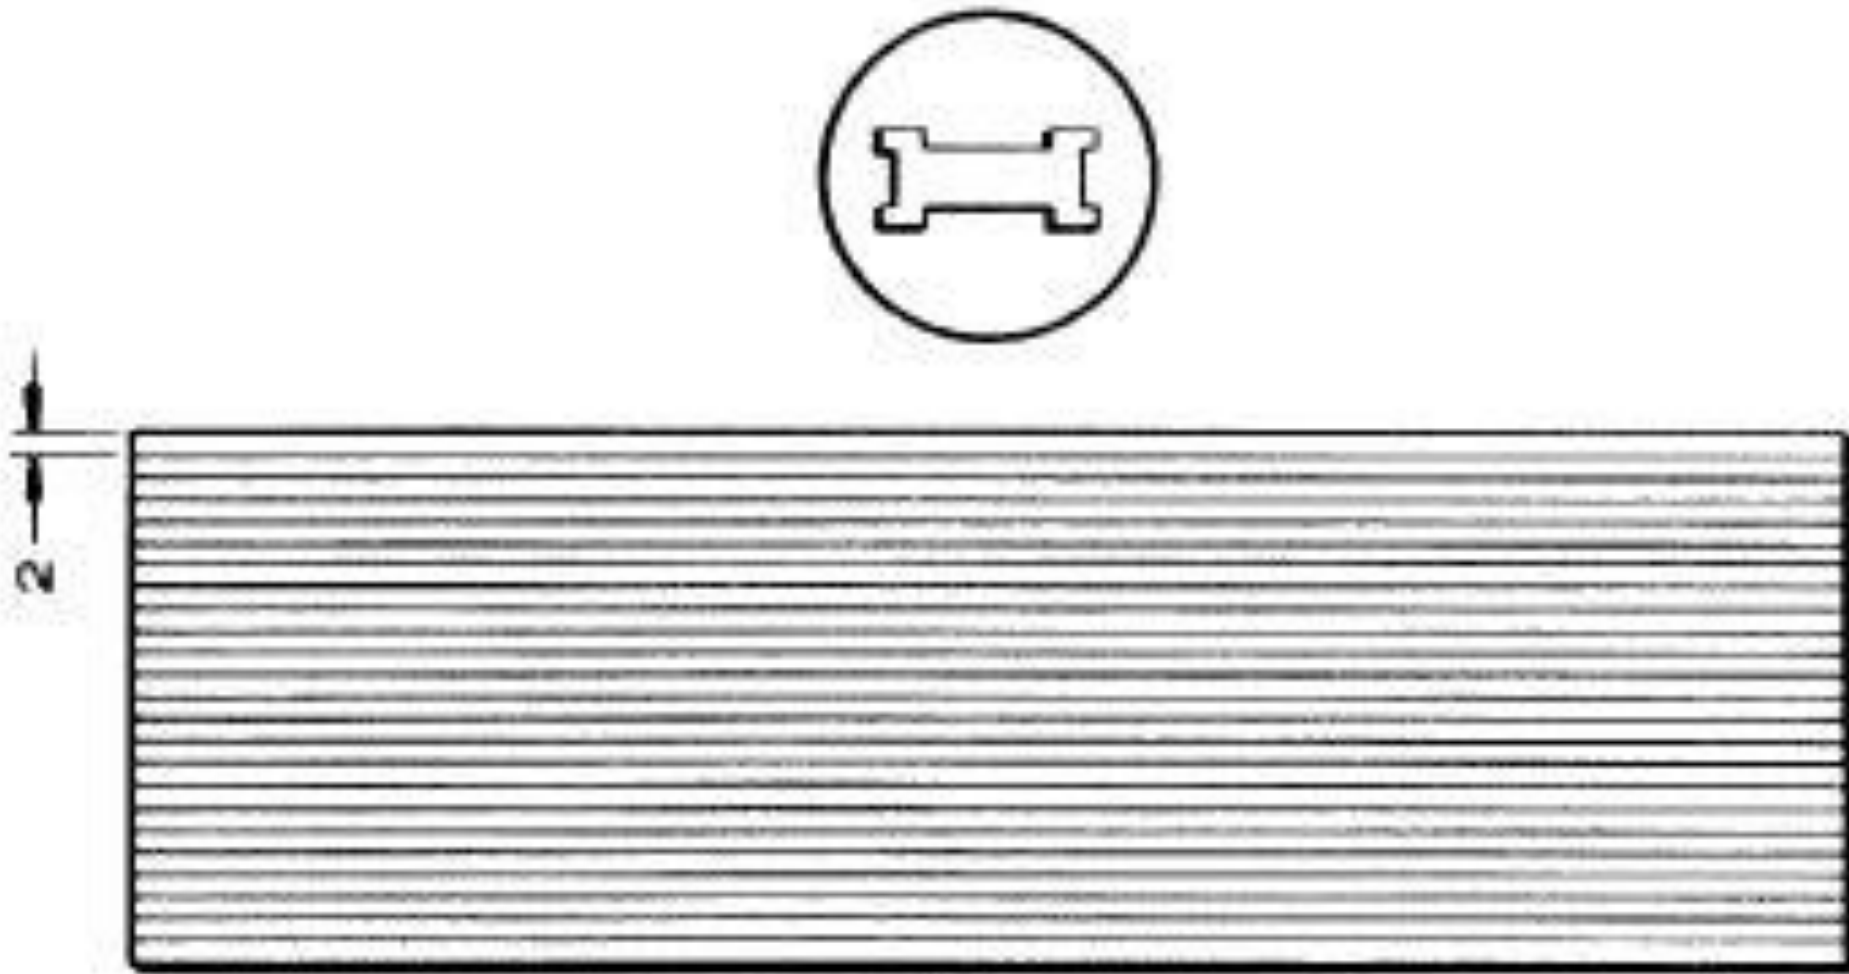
Strips per sheet with narrow strip blank layout for production in a cut-off die.
